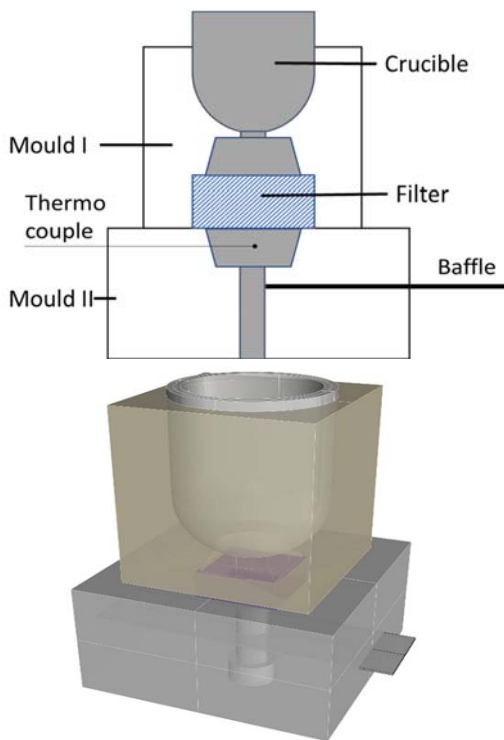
The sketch of two sand moulds and filter in the middle (cross section and 3D)
